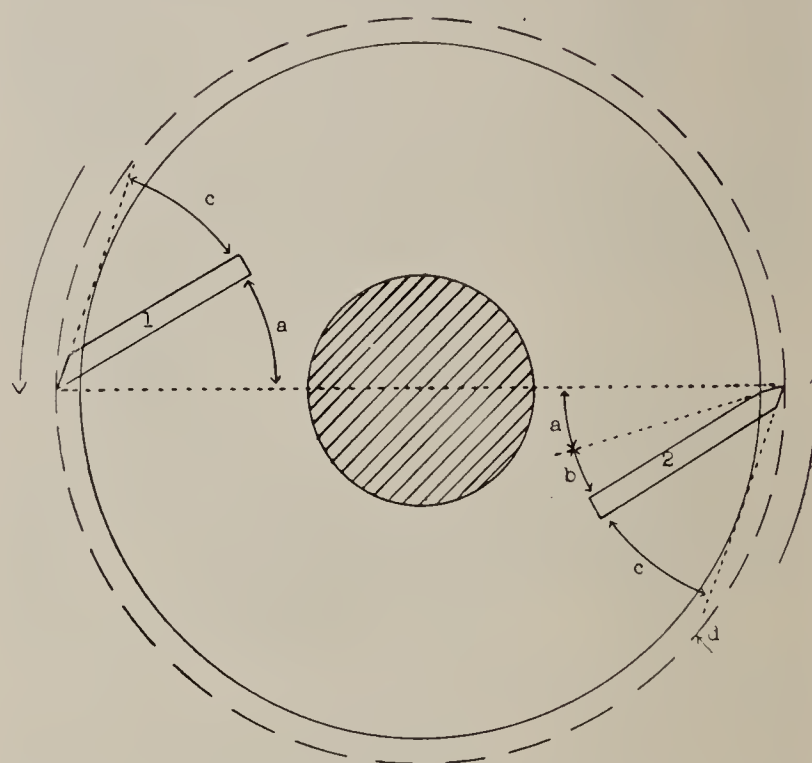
Terms used in connection with planer knives: *a*, cutting angle; *b*, cutting bevel; *c*, clearance bevel; *d*, cutting circle; 1 and 2, planer knives.
